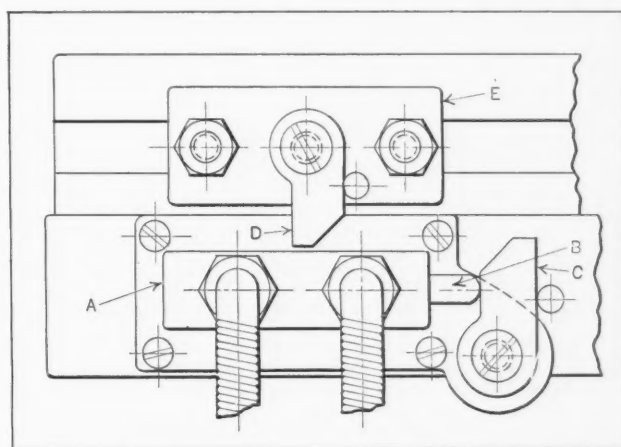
Air Valve Attached to Lathe Cross-slide for Controlling Work-indexing Mechanism of Chuck
